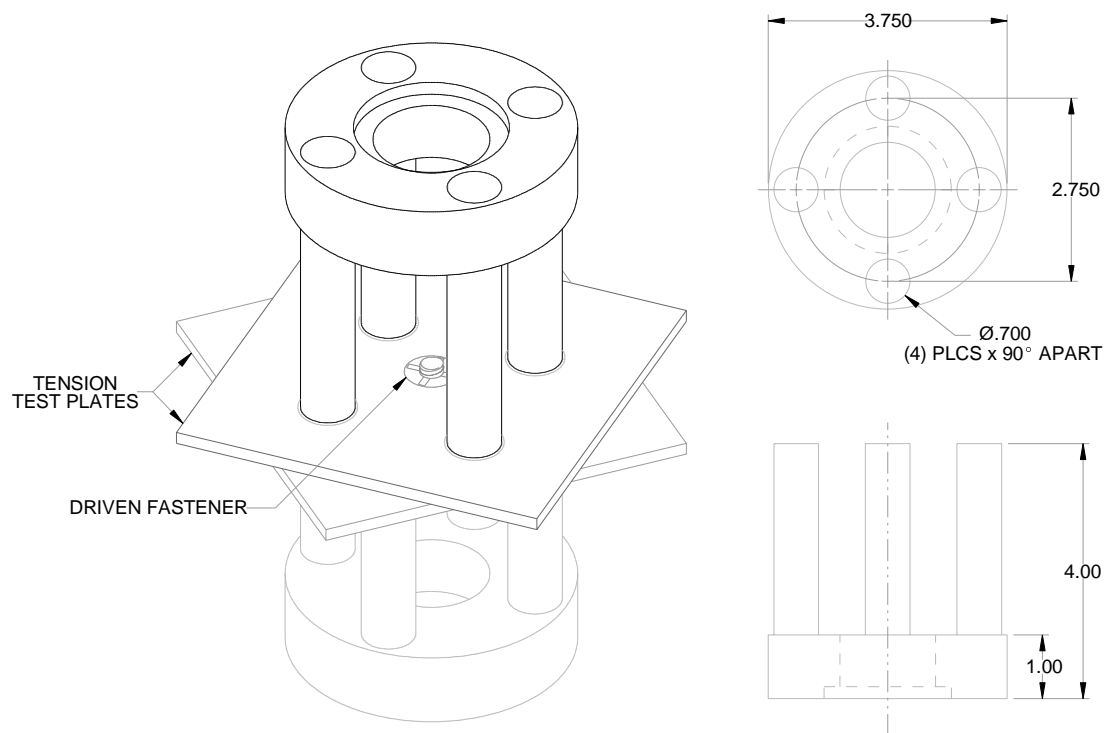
(b) Fastener pull-thru test fixture.
